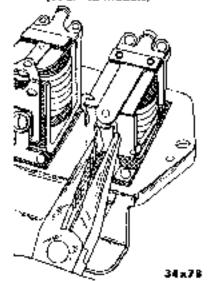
Adjusting and Aligning Circuit Breaker Contact Points (1937-42 Models)
